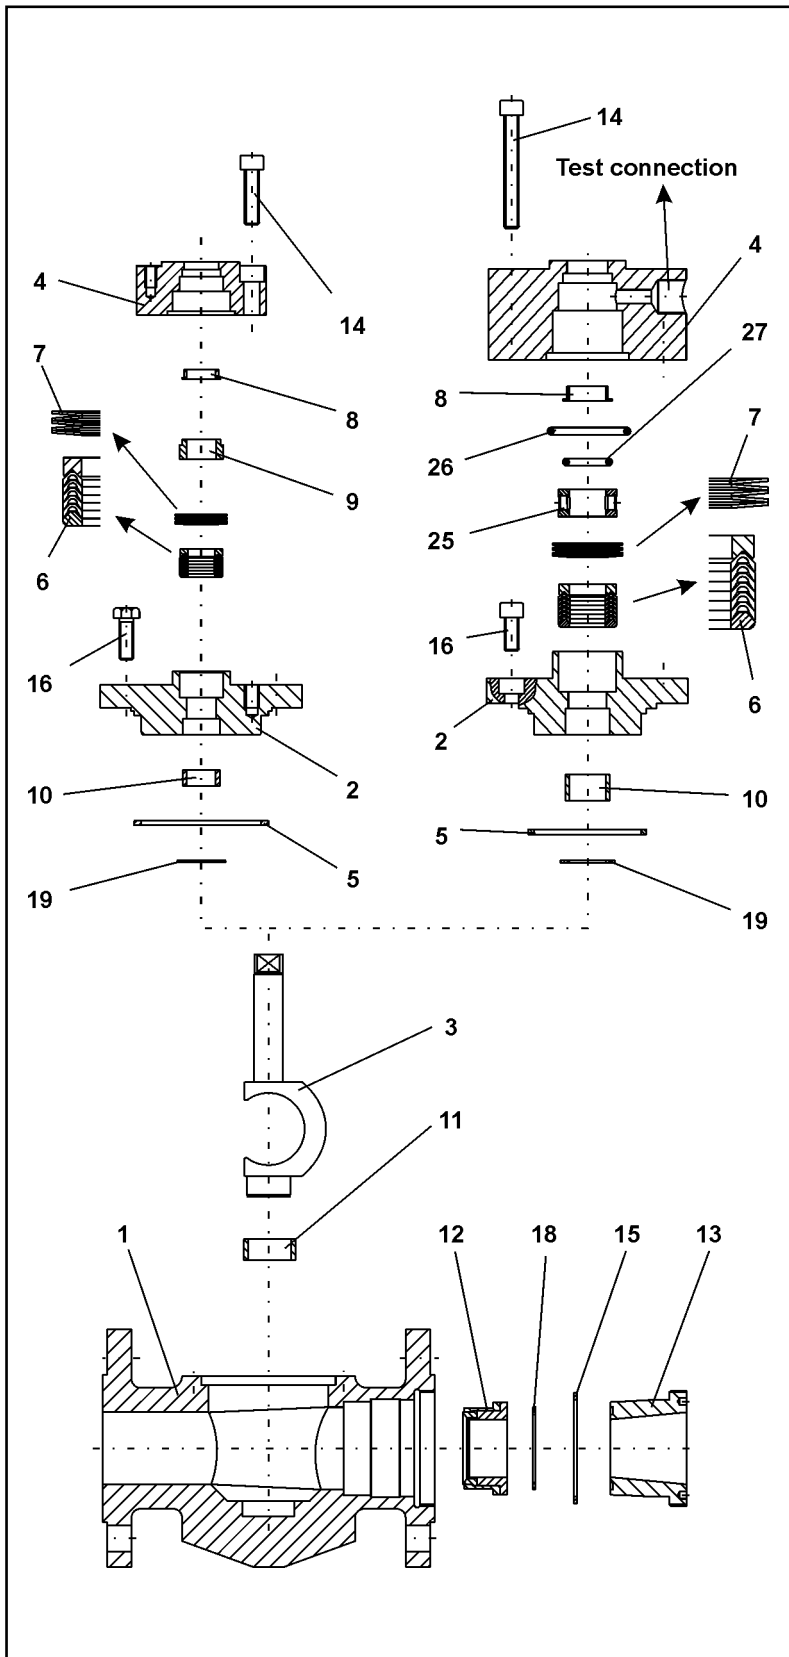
Exploded view of Series 23b Rotary Plug Valve
